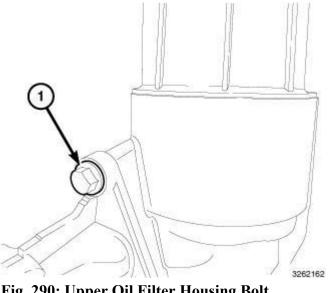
Upper Oil Filter Housing Bolt Courtesy of CHRYSLER GROUP, LLC
